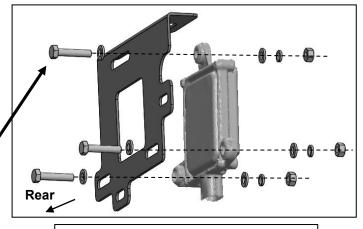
Disassemble factory bumper to remove Blind Spot Sensor (BSS) (MY18-21 pictured)
